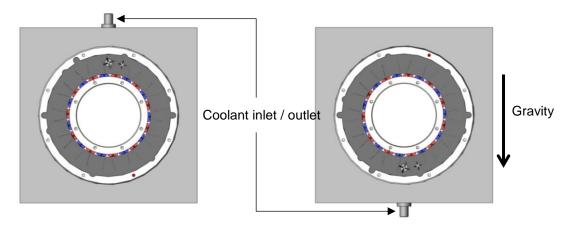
Coolant inlet / outlet position when mounted vertically
